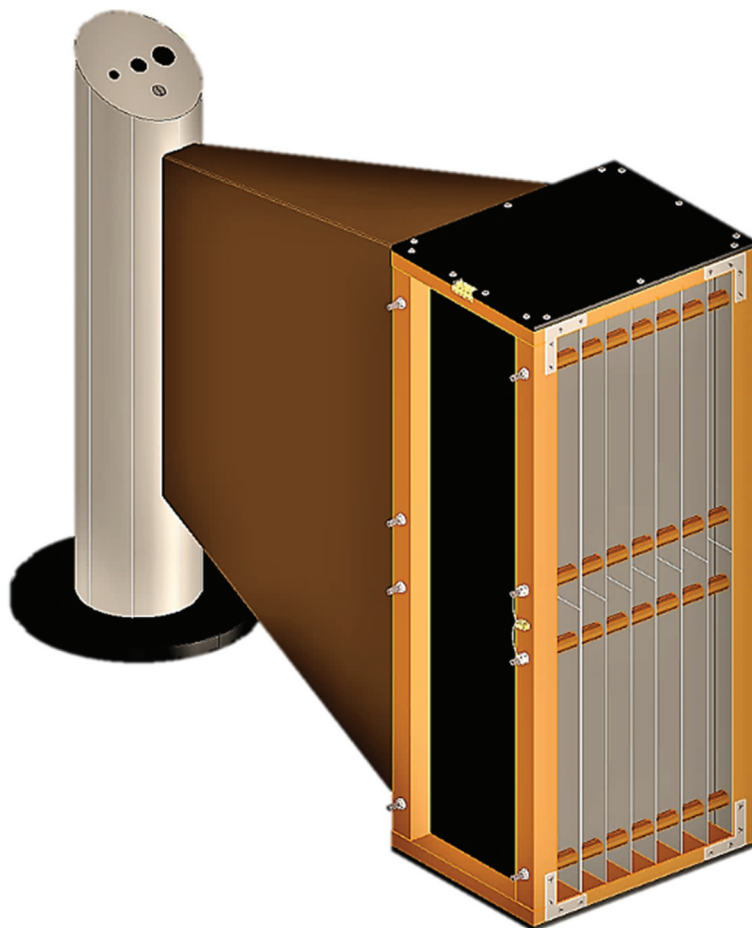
AutoCAD 3D model of the geometrical configuration chosen to couple the ESP with the tower fan.
